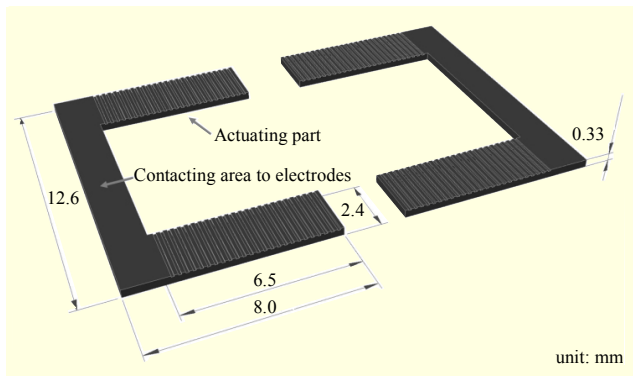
Layout of IPMC actuator incorporated into compact camera module.
